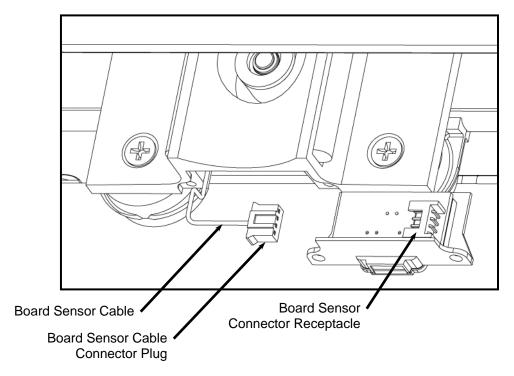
THE BOARD SENSOR CABLE AND CONNECTOR
